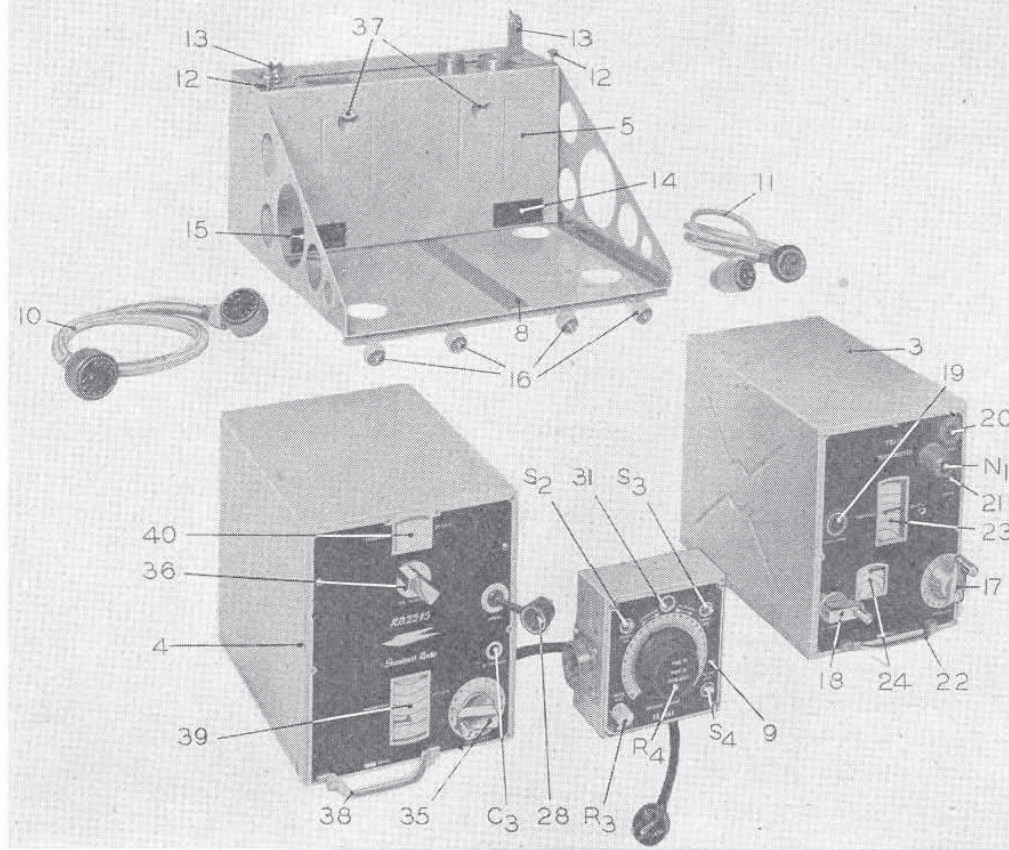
DISSEMBLED VIEW OF T.R.1161 EQUIPMENT
